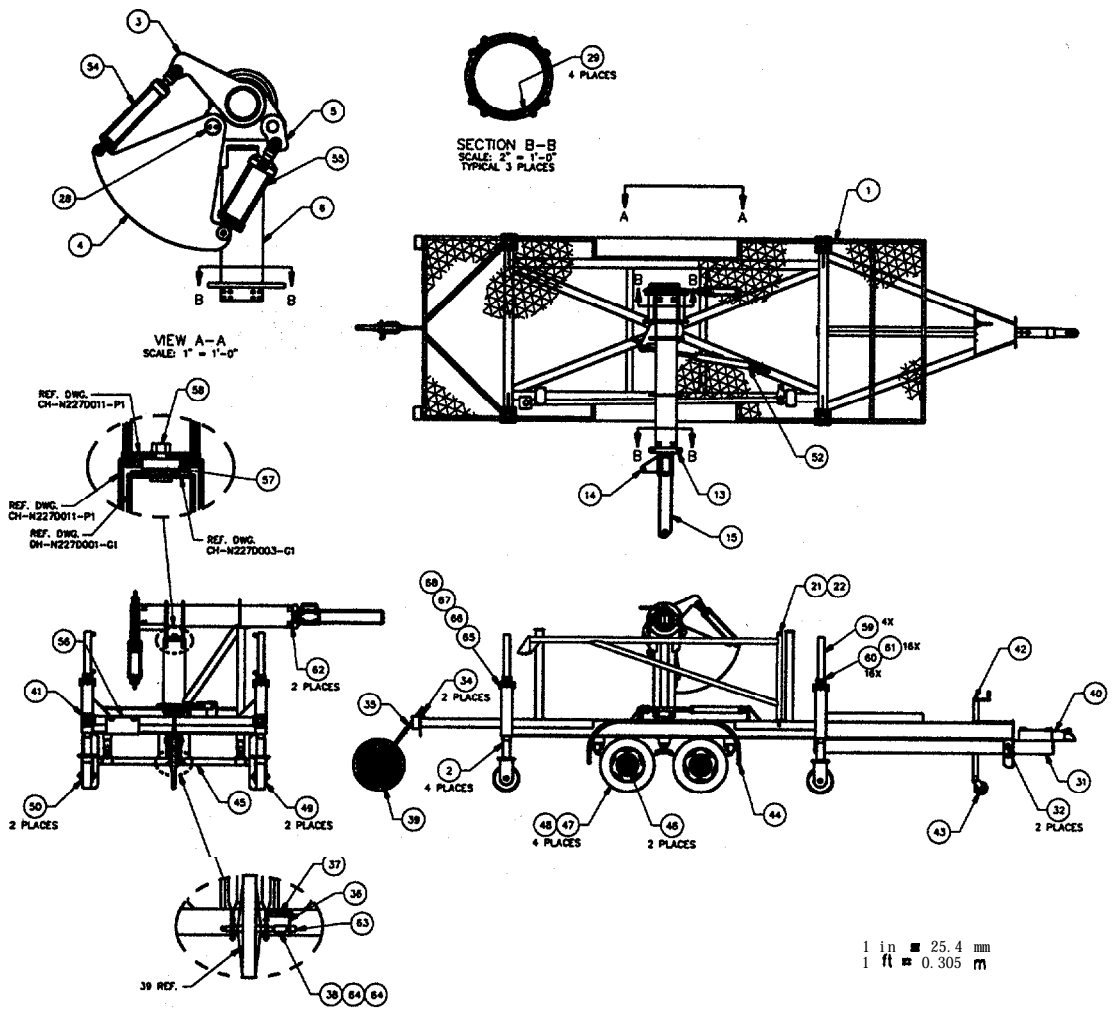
Mechanical drawings of Bridge Inspector and parts list.
